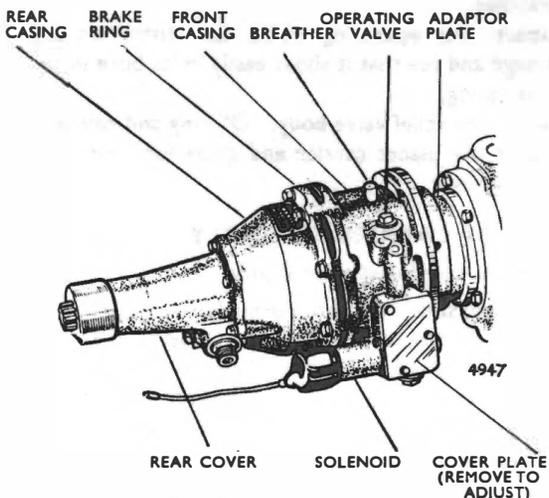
Side view of unit (Later units have an external balance pipe and a plug replaces the breather)
